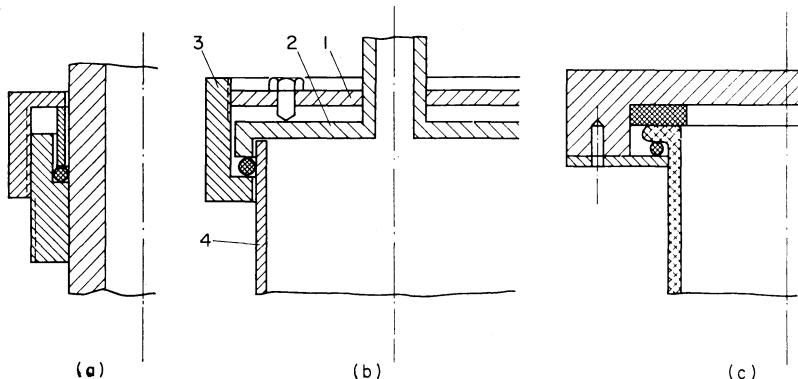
Step seal consisting of three parts: (a) shaft seal; (b) straight end seal (after Seki¹¹¹⁸); (c) "flared-end" seal (after Evans³⁶¹) *Courtesy of The American Institute of Physics
